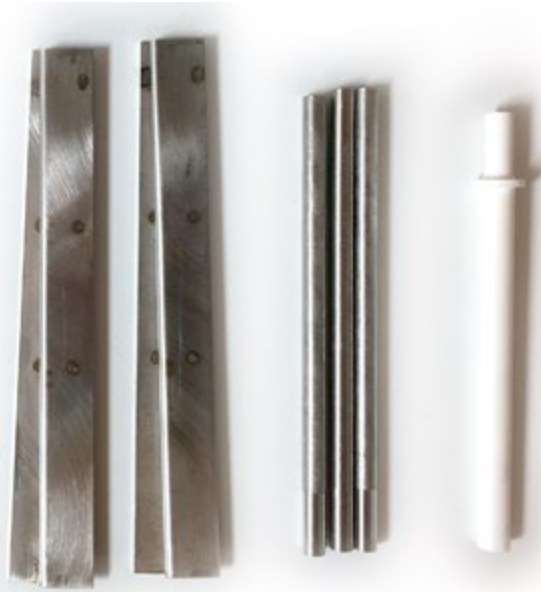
Photographic image of the three Dycomet 523 divergent inserts. From the left to right: rectangular section stainless steel, circular section stainless steel and circular section ceramic.
